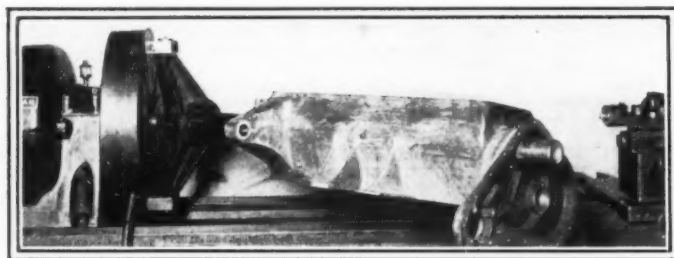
Showing how arbor of lathe shown in Fig. 7 is hinged to readily admit of placing the crankcase on it
